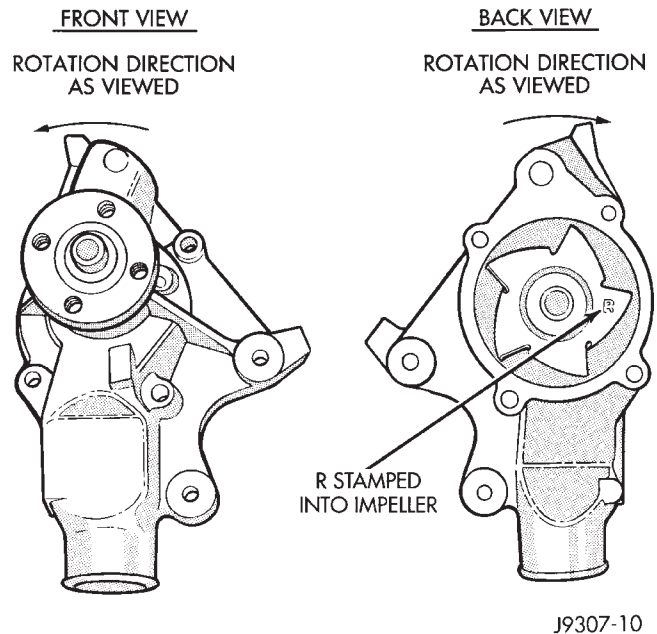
Reverse Rotating Water Pump—4.0L6-Cylinder
